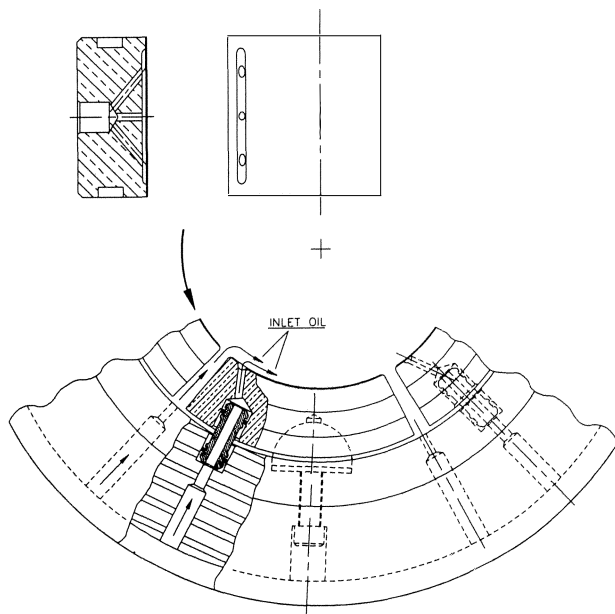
Leading Edge Feed Groove Tilt Pad Bearing Design.
